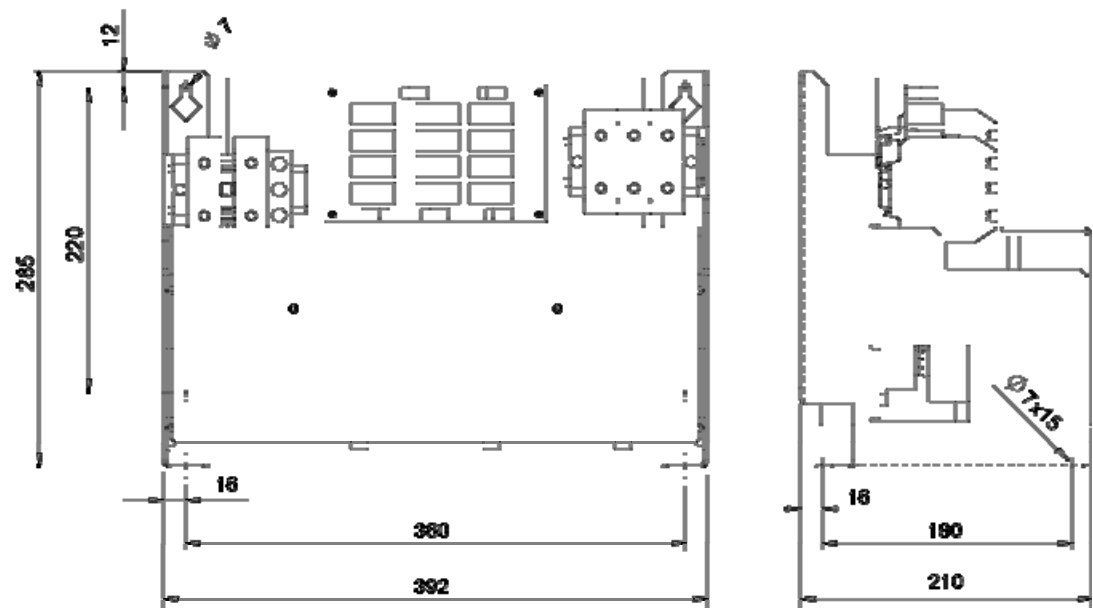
Dimension drawing of the voltage peak limiter, type 2
